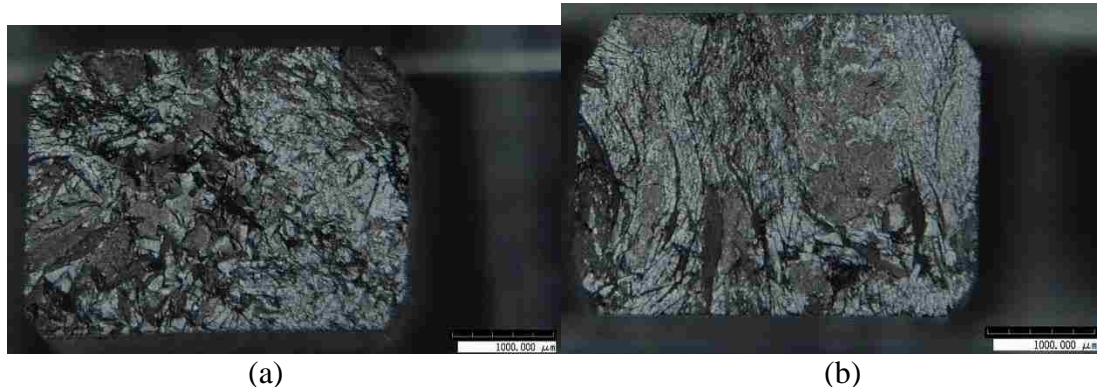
Fracture Surfaces of Flexure Test Bars Printed with 25 wt% by Water Glycerol Concentration; (a) Bar #1; (b) Bar #2 from Table 3.6
